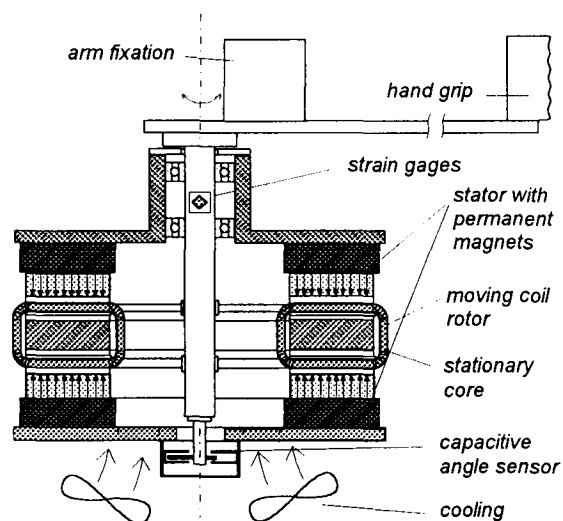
Mechanical design of the actuator. The shaft carrying the coil assembly (rotor) is pivoted by two ball bearings and attached to the forearm lever.
